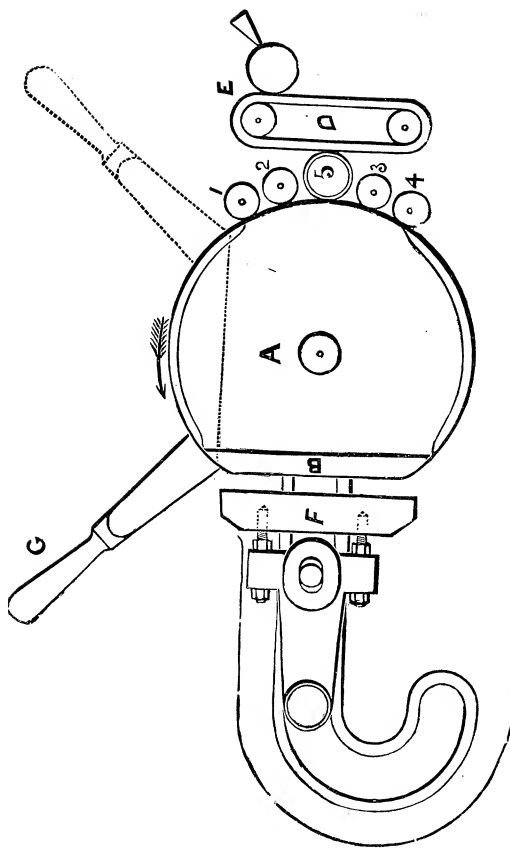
DIAGRAM OF INVICTUS PLATEN MACHINE.
